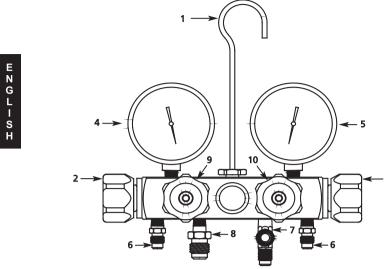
Repair Parts Illustration for Manifold Gauge Sets
